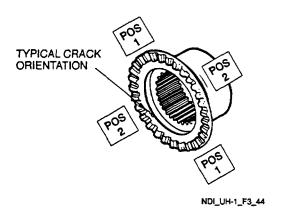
Tail Rotor Gearbox Outer Coupling
